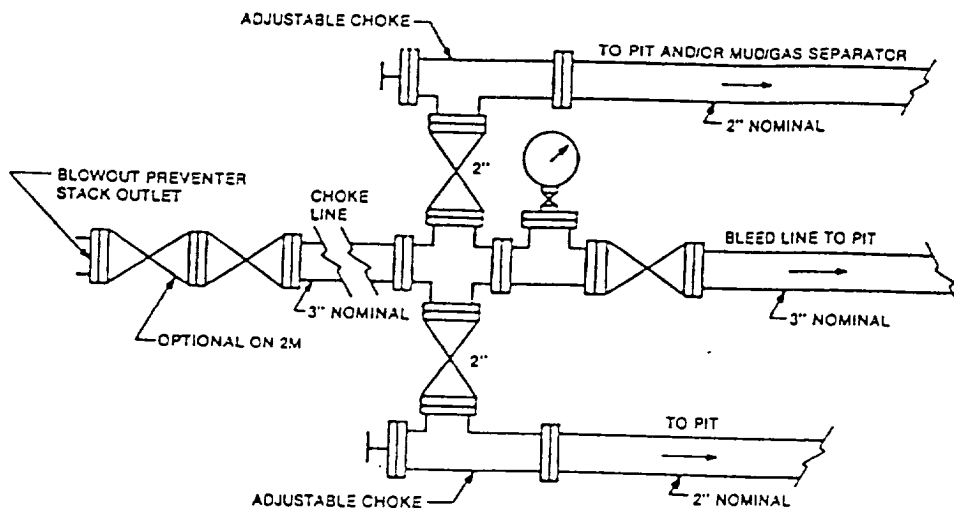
Typical choke manifold assembly for 2M and 3M rated working pressure service — surface installation.
